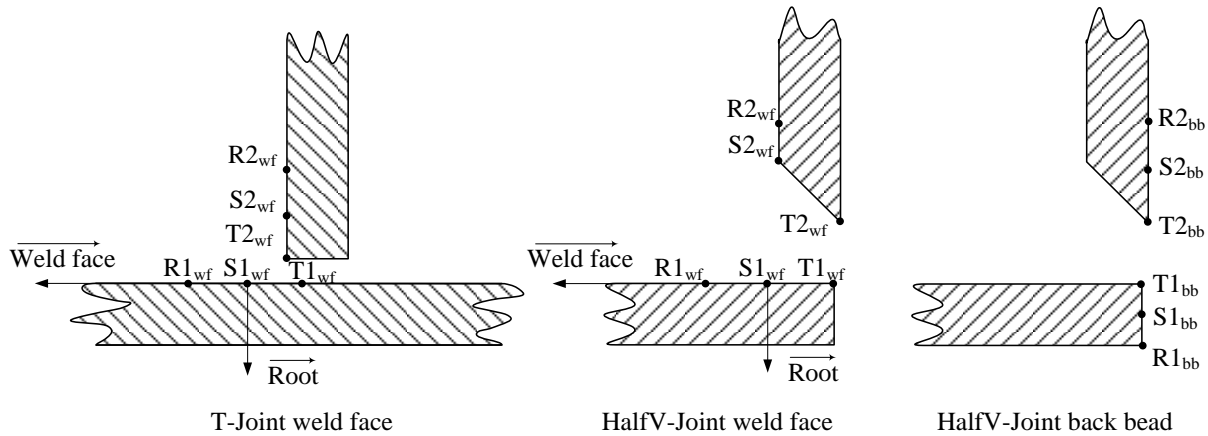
Breakpoints before welding the T-Joint and HalfV-Joint.
